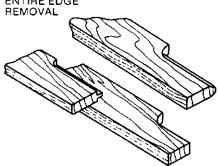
Shaper cuts can remove part of or the entire edge of the workpiece. Note: Depth of cut exaggerated for clarity.
